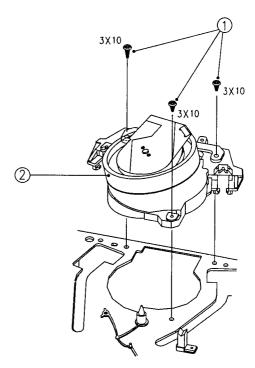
DRUM TOTAL ASS'Y & EARTH BRKT ASS'Y REMOVAL
